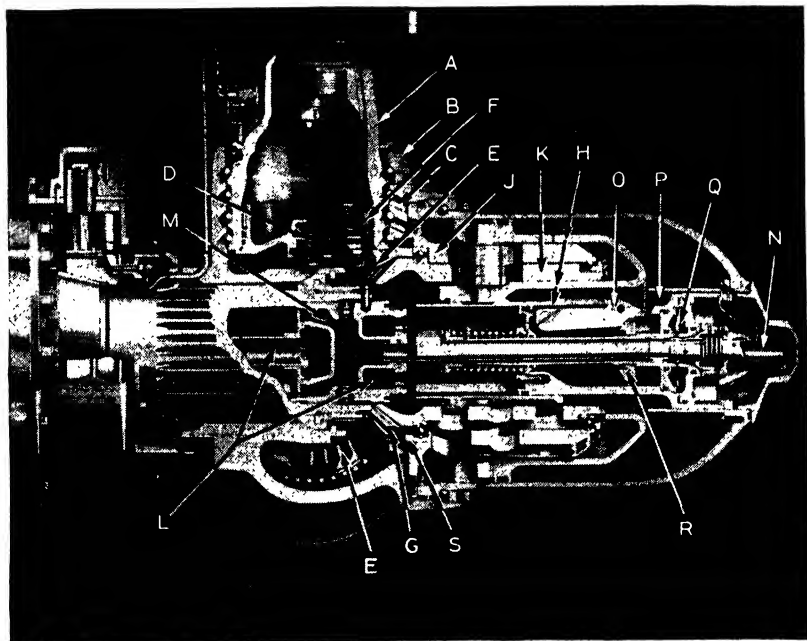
Cutaway of *Reversing Hydromatic* hub. (*Hamilton Standard Propellers.*)
